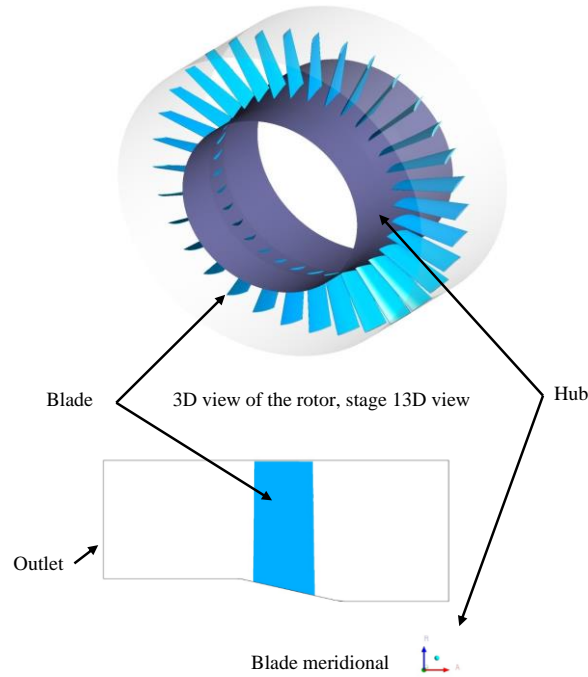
Geometry of the T-56 Engine First Compressor Rotor
